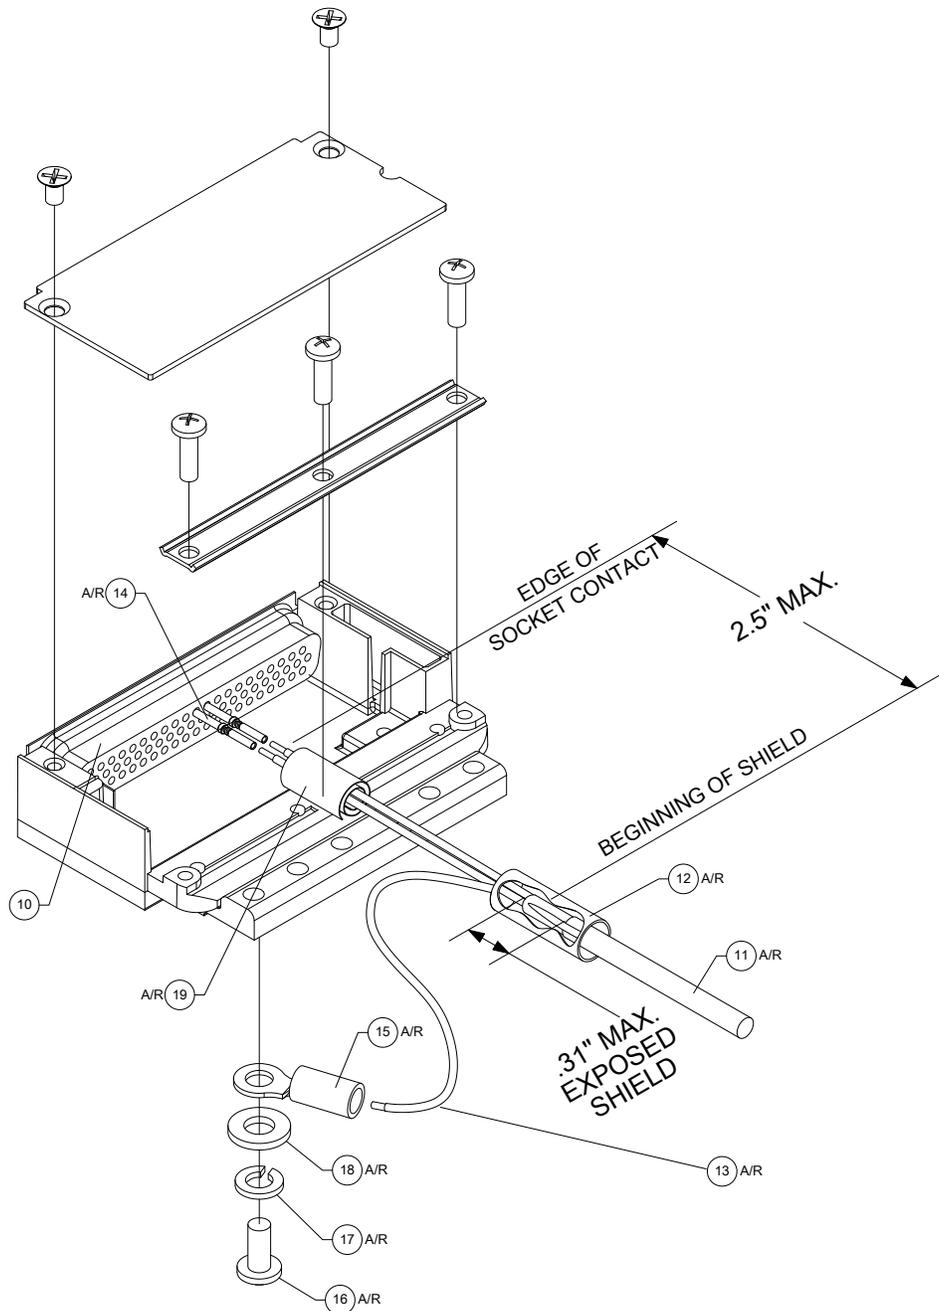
Shield Termination on Backshell Assembly (Preferred Method)
